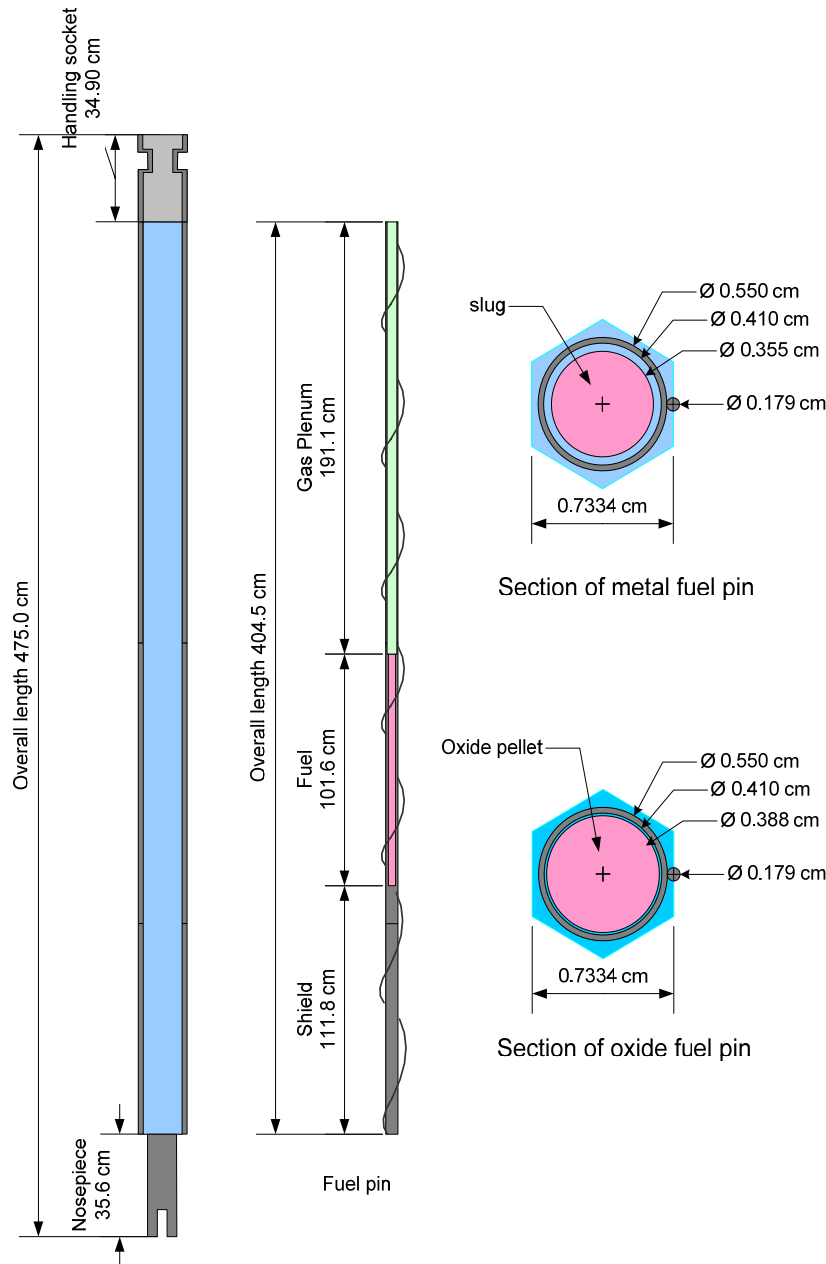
Schematics of Fuel Assembly and Fuel Pins
